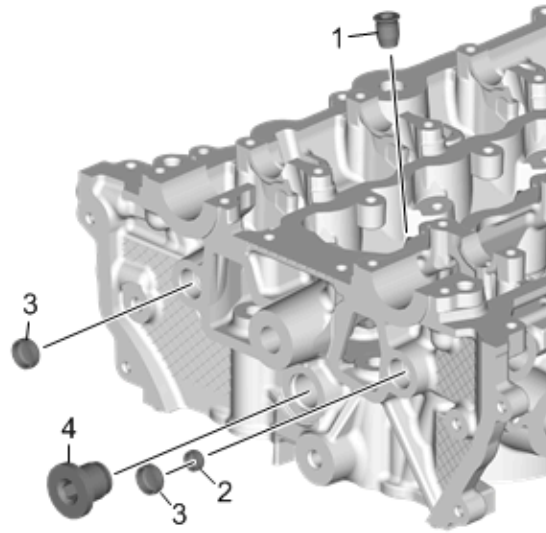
Cylinder Head Core Hole Plugs, Oil Gallery Plugs And Oil Gallery Restrictor
